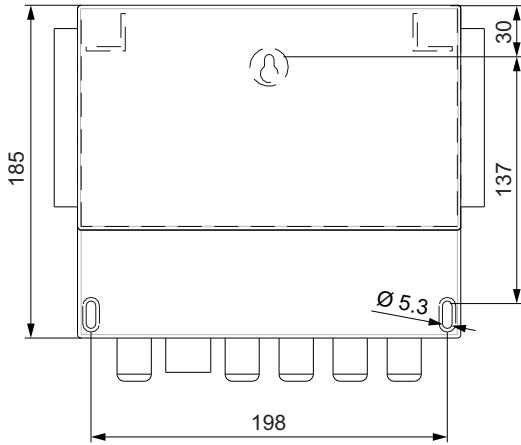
Dimensions of CU 382 control unit for wall-mounting, back (in mm)
